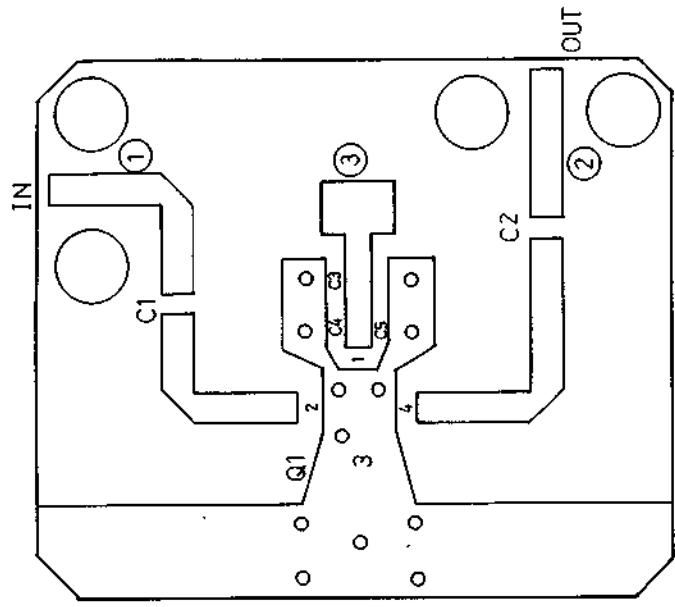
(1/2) A18-A1 ISOL AMP PC-Board Parts Layout (Component Side) 44
